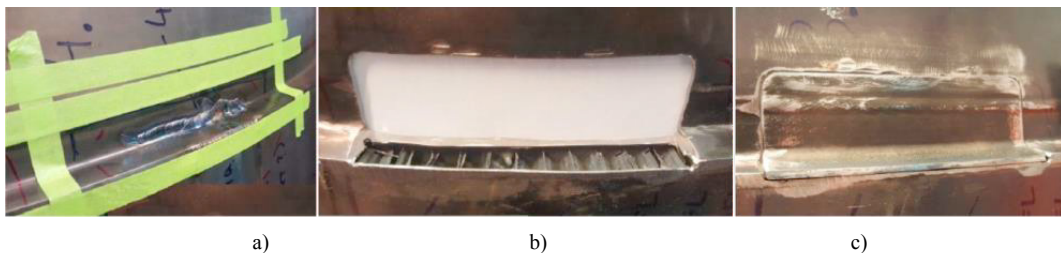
(a) Damaged area; (b) Damaged section cut off; (c) Patch from donation nozzle inserted (before welding).
